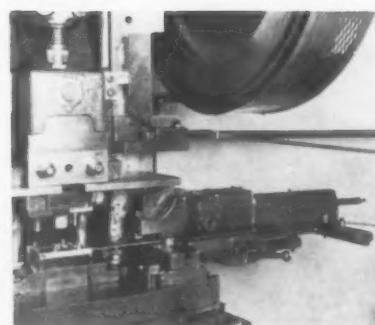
, center, the Rol-Die-Feed, by H. E. Dickerman Mfg. Co., Springfield, Mass. This feed handles stock up to 3/16 in. thick in weights up to 2 lbs. per lineal foot. Particularly suited to feeding deep drawing or forming dies, this cam-driven feeder provides 9 in. feed length on a 3 in. stroke press.
